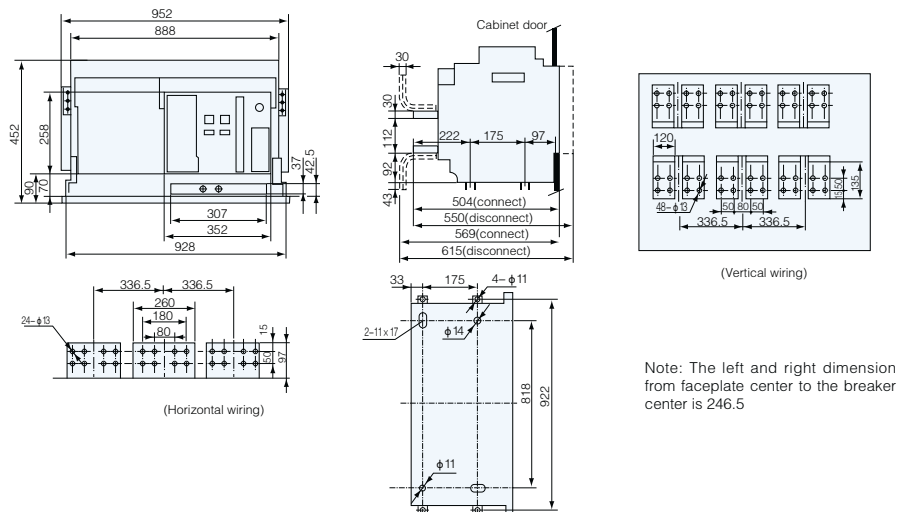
overall and mounting dimensions of drawer type breaker (OW18-6300 In=6300A)
